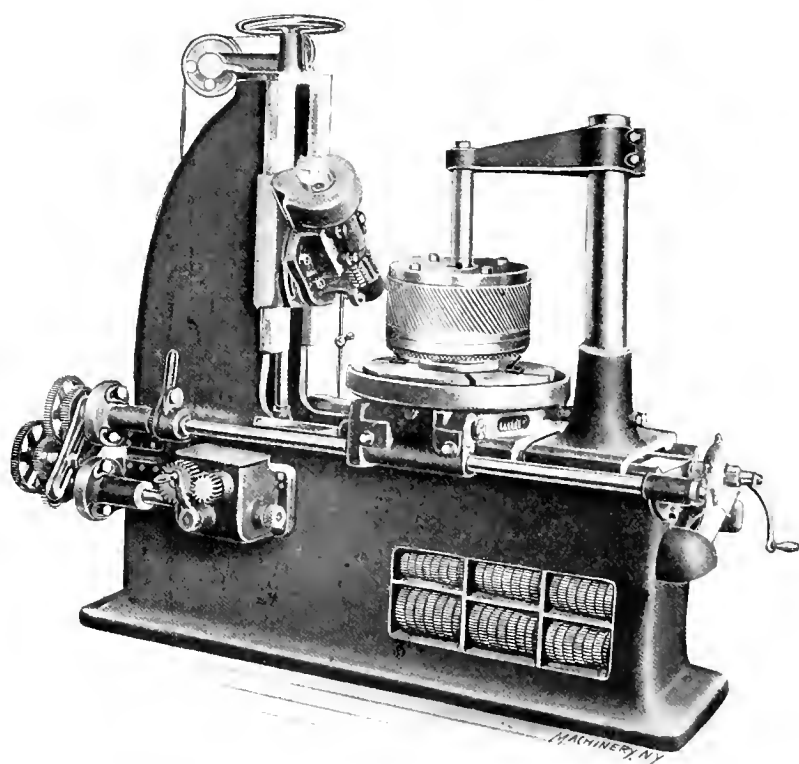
Automatic Gear Hobbing Machine for Spur, Spiral and Worm Gearing.
